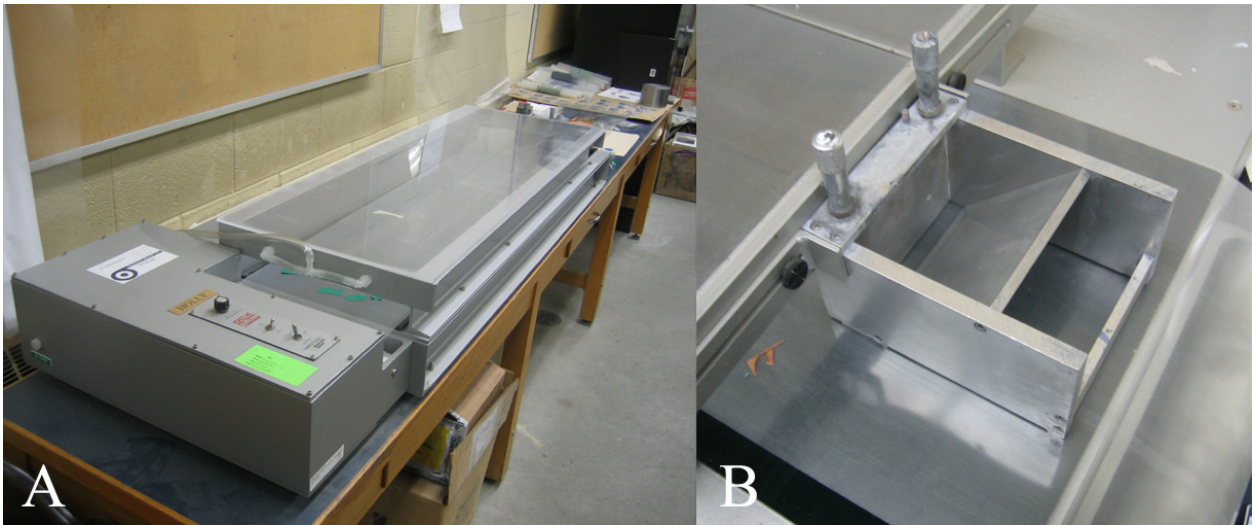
Casting apparatus. A - tape casting machine. B - slip reservoir and adjustable doctor blade.
